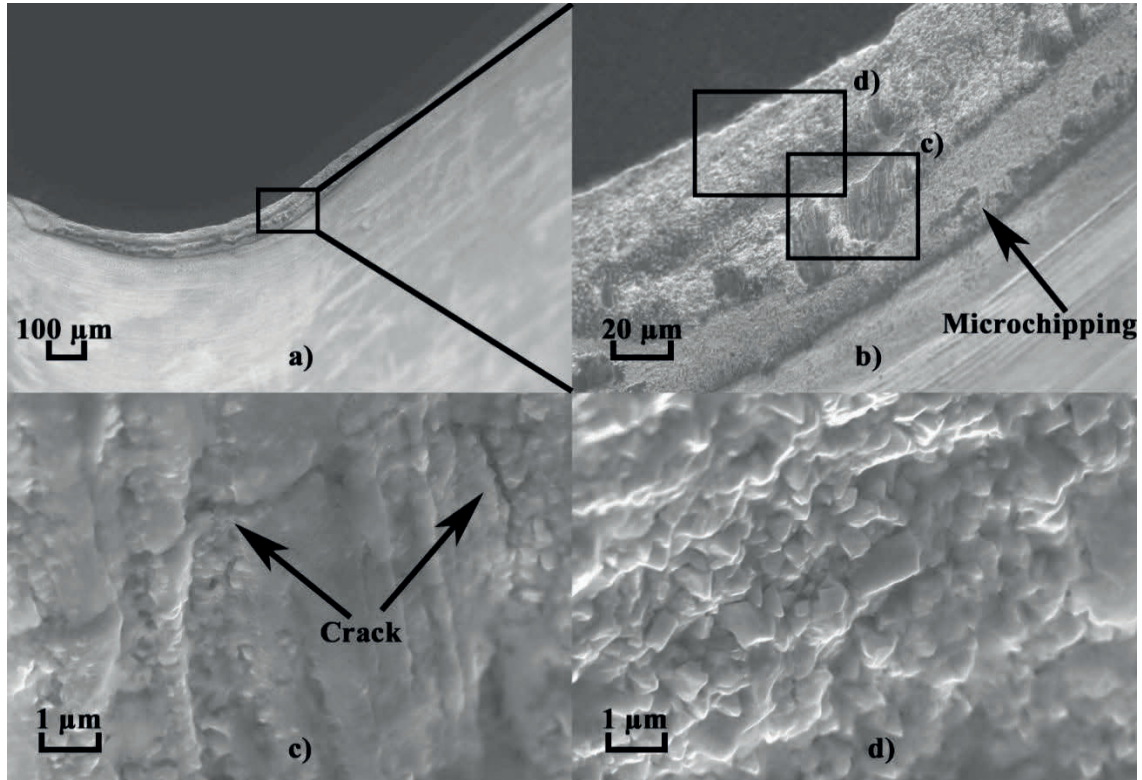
SEM photographs corresponding to the flank face. Tool: TiAlN coated; workpiece: P520; cutting speed: 150 m/min
